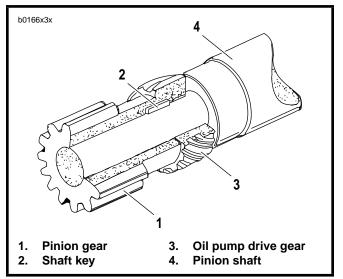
Oil Pump Drive Gear and Pinion Gear Installed on Pinion Shaft
